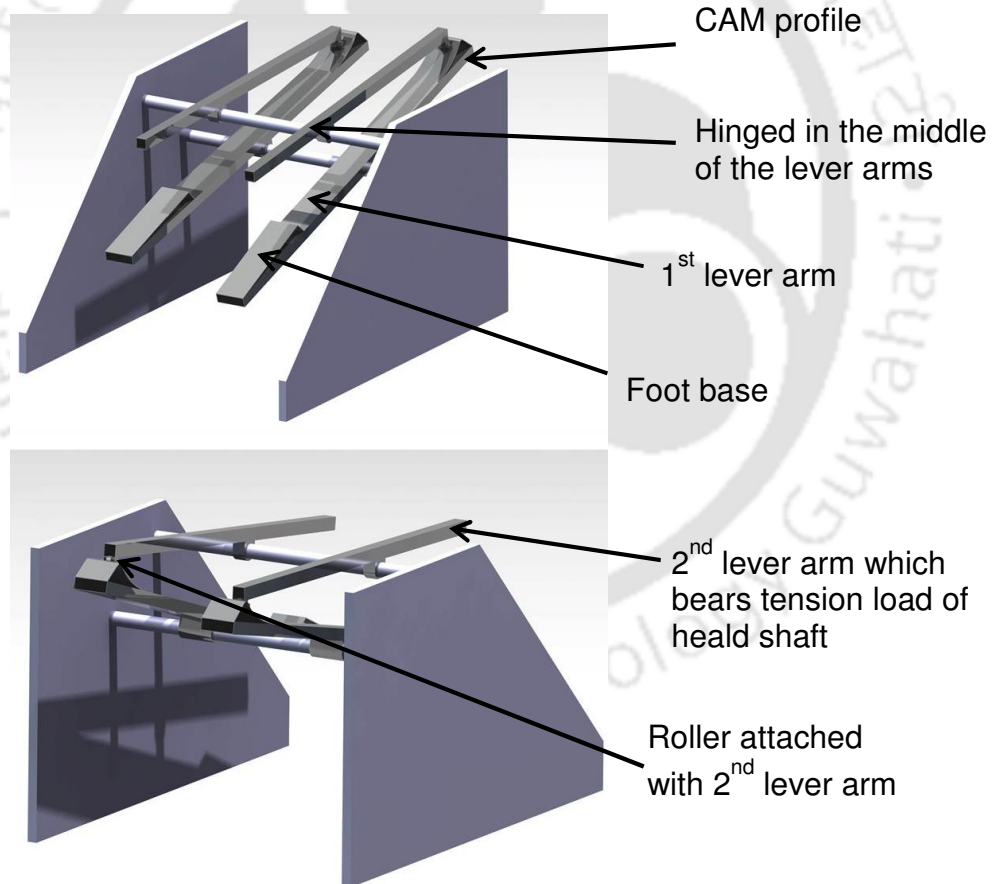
CAD drawing of the modified pedal with cam profile
